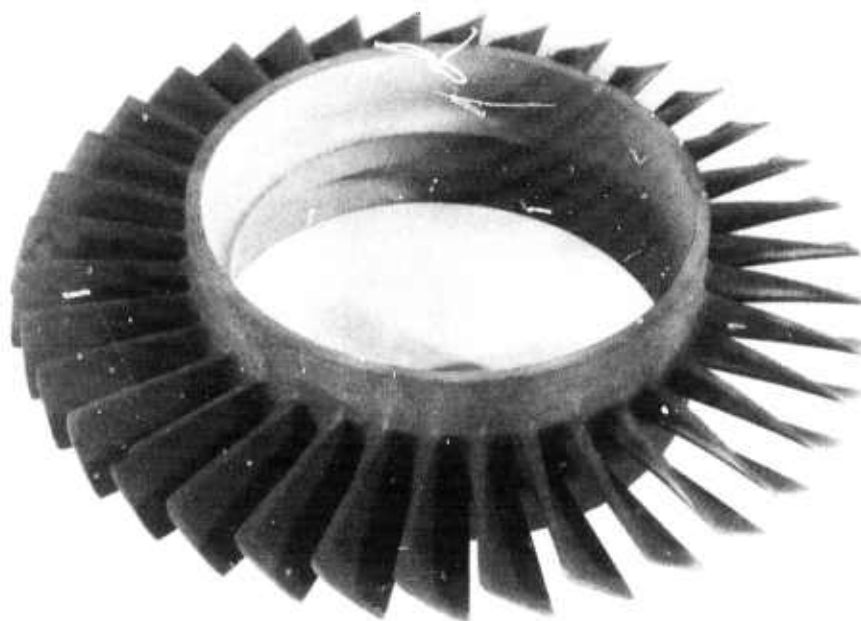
Slip Cast Turbine Rotor Blade Ring
